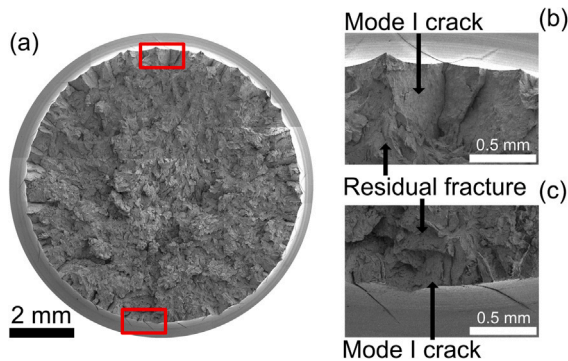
Representative fracture surface of predeformed test bars cyclically shear loaded against the direction of predeformation with a static compressive axial load. (a) overview, (b) and (c) detailed view.
